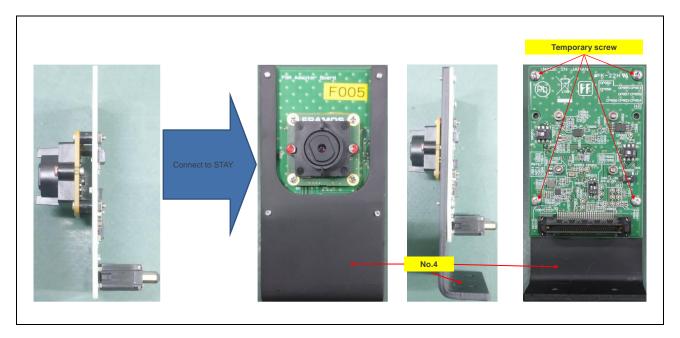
Connect FSM Adapter Board to Stay (FSM-IMX462)
